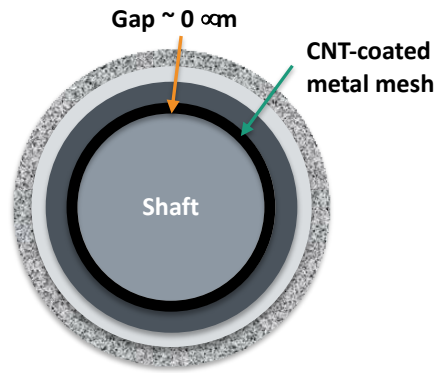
Floating seal mounting for reducing the ID damage of the CNT-coated metal mesh seal.
